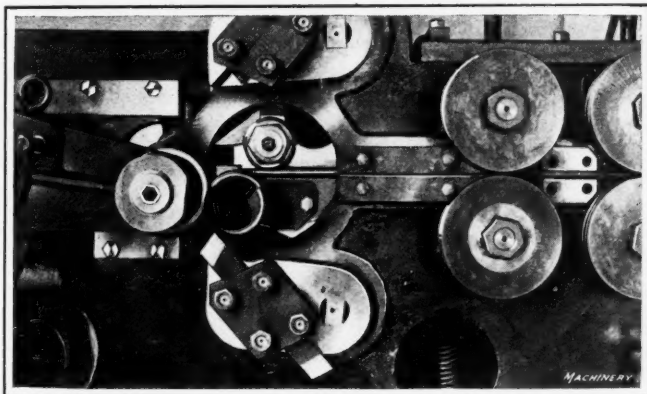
Close View of Coiling Mechanism on Sleeper & Hartley No. 5 Spring Coiler
